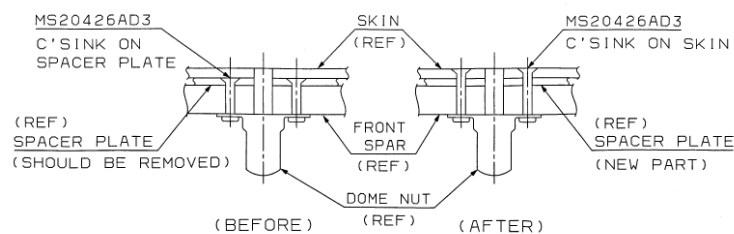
INSTALLATION OF TACK RIVET AND NUT PLATE
